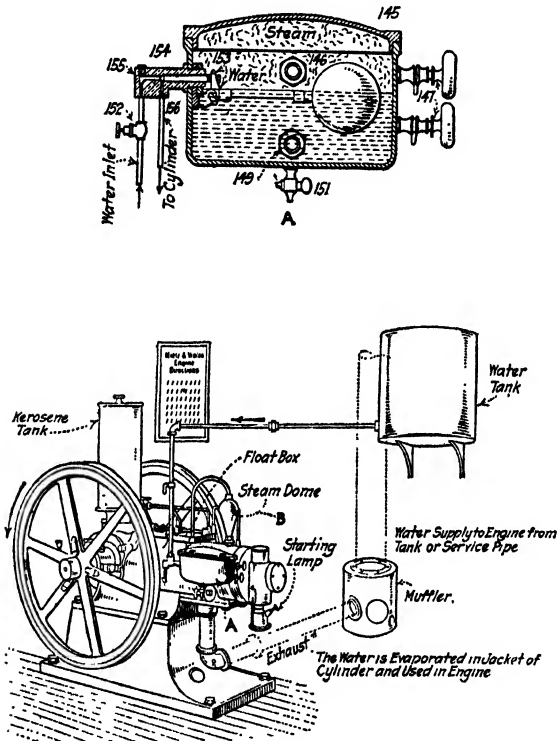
The Mietz and Weiss two-cycle hot-bulb oil engine.
